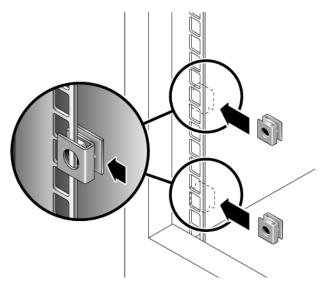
Inserting Cage Nuts Over Rail Mounting Holes in Cabinet Rails
